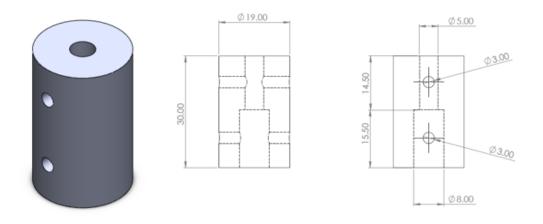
CAD model and dimensions of the 5mm to 8mm connector
